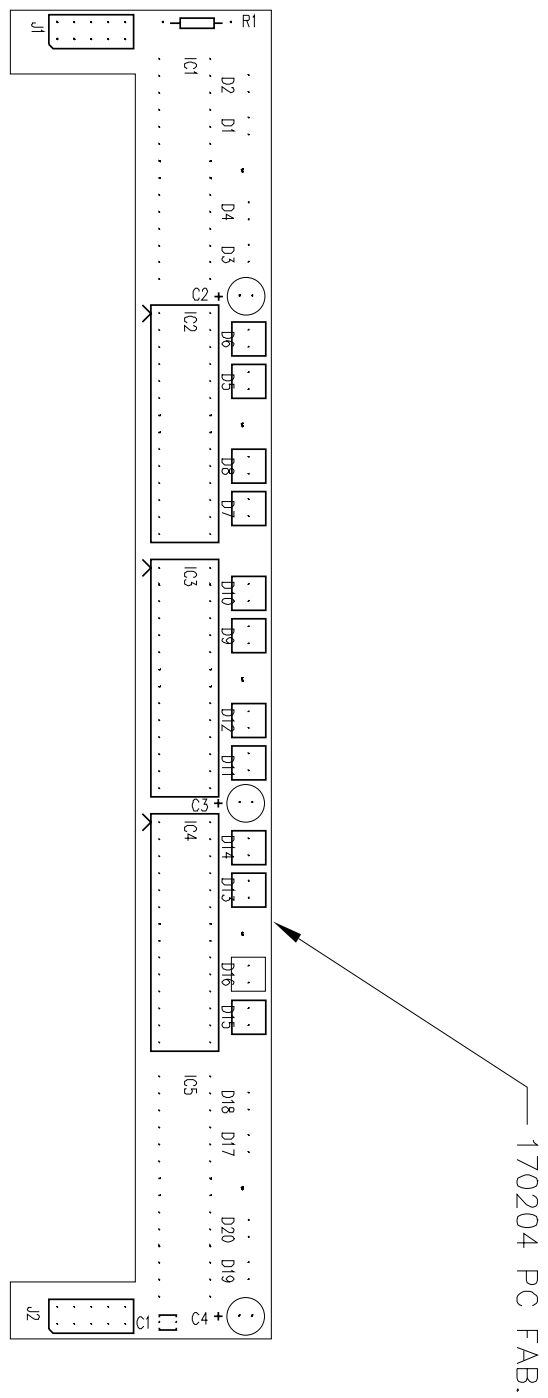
Assembly Drawing—ICS-52/52T Selector Switch LED PCB Rev. A
